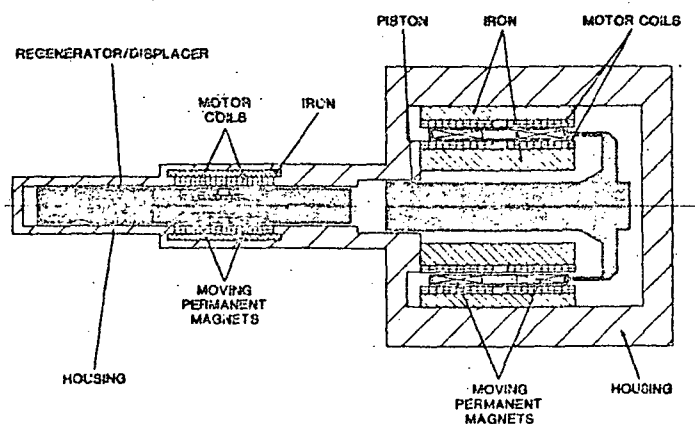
Cross-sectional view of rectilinear drive showing displacer and piston motors.
